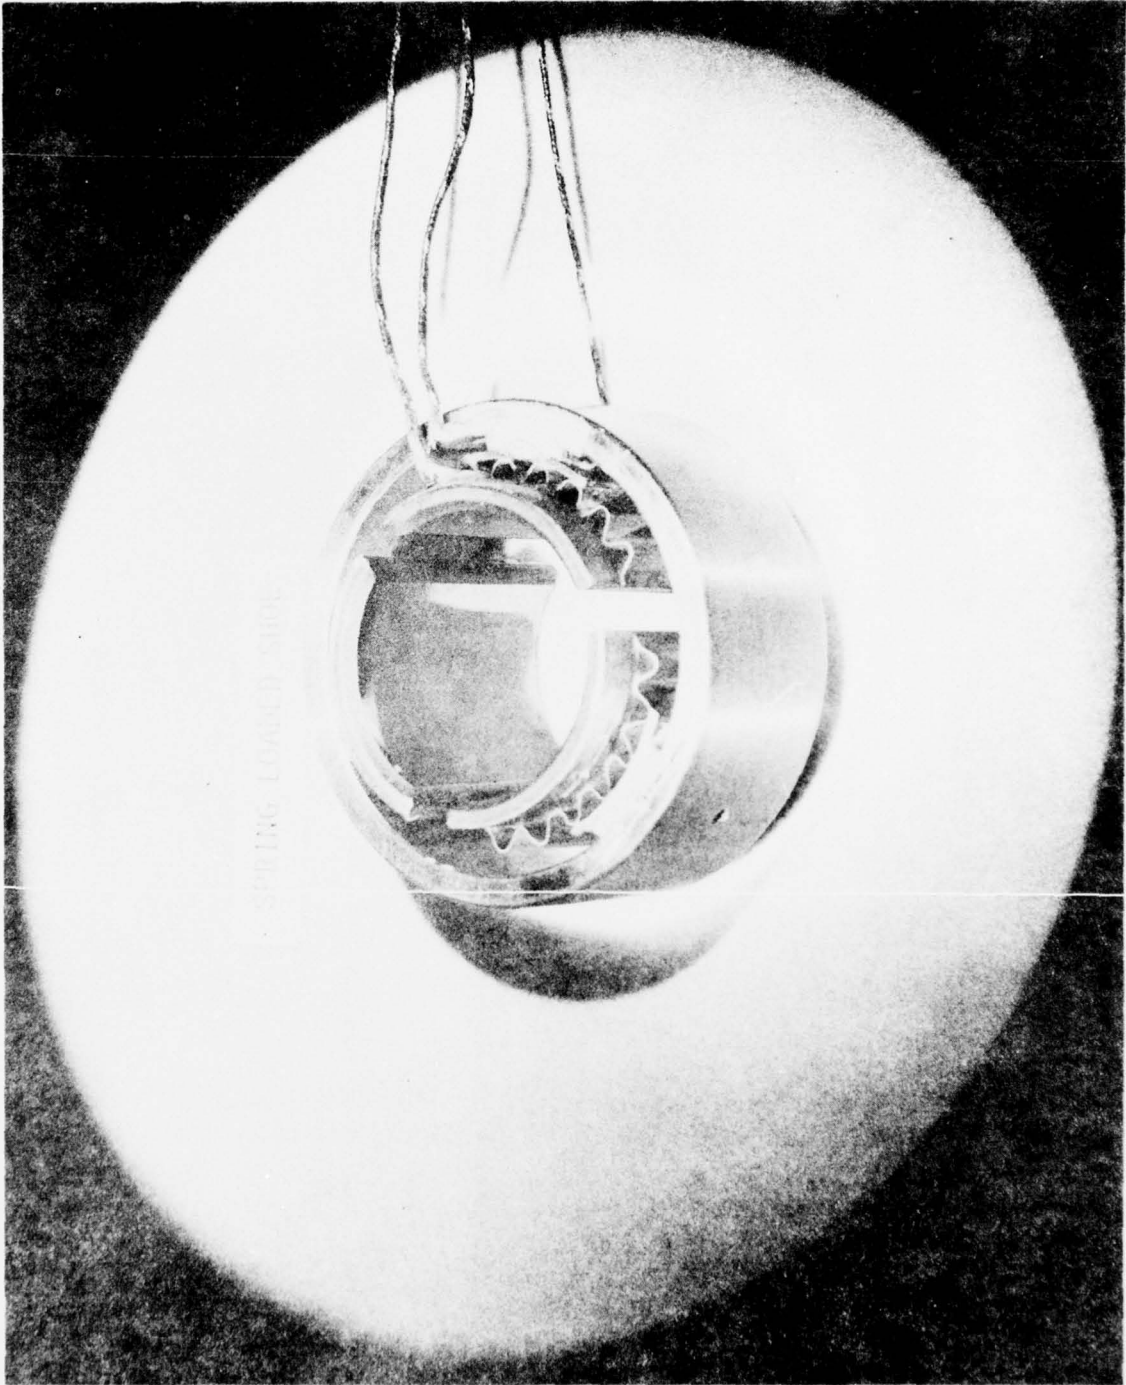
Condition of Outboard Bearing After Tape Rupture
